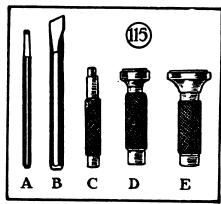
A is a spindle body bushing bracket, B an inner or outer ball race remover, C a spindle arm bushing driver, D a front wheel outer ball race driver, E a front wheel inner ball race driver
